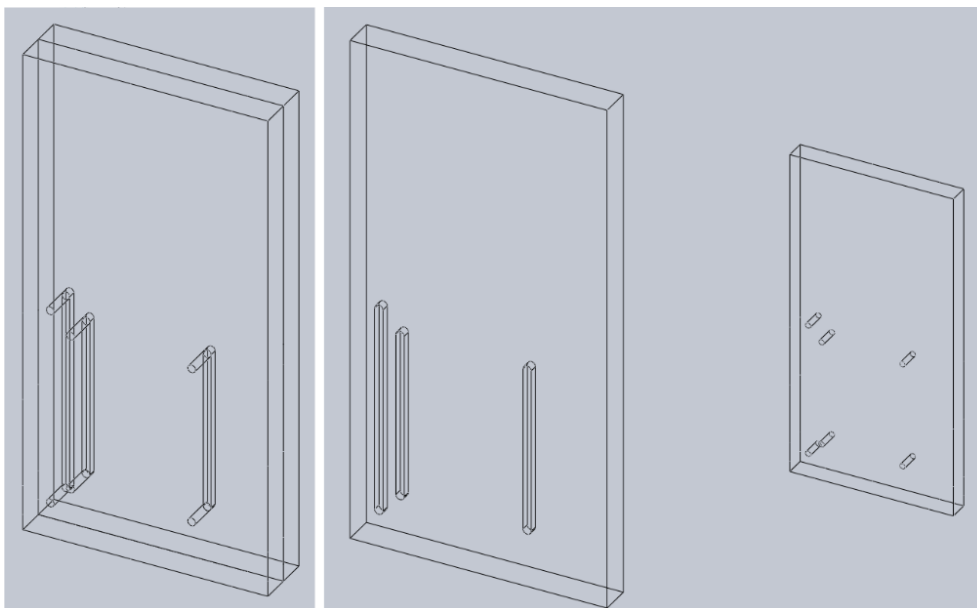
CAD views of the COP slides assembled (left) & disassembled (right)
